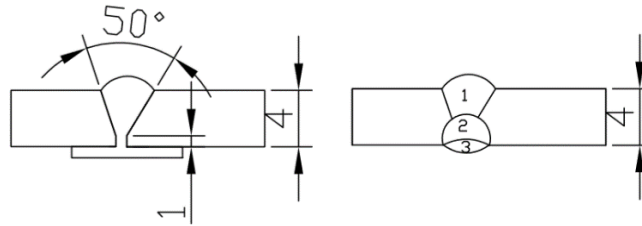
Schematic illustration of the plates during the welding process.
